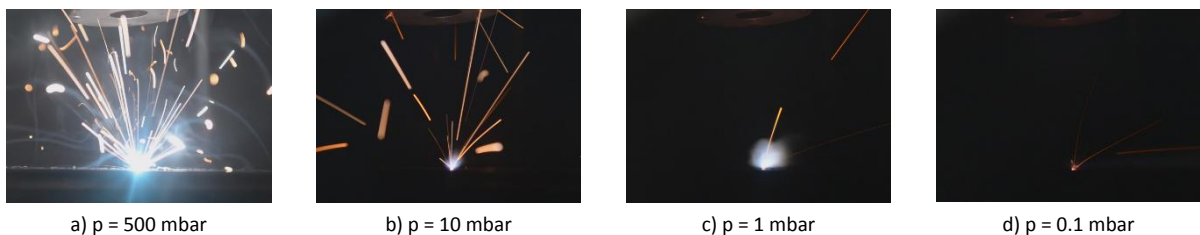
Weld spatter and vapour plume at varied ambient pressure (welding speed 2 m/min) EN AC-AlSi10MgMn
